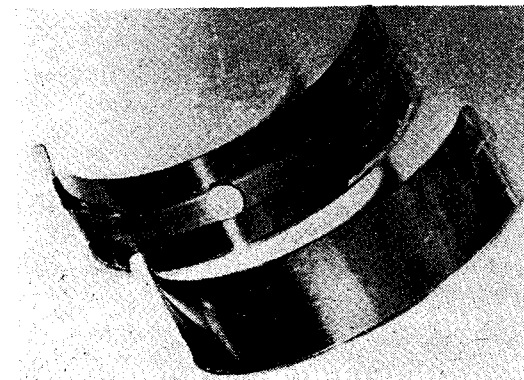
A MATED SET OF MAIN BEARING INSERTS, ONLY THE UPPER LIGHTLY-LOADED HALF BEING PROVIDED WITH A CENTRAL OIL GROOVE
